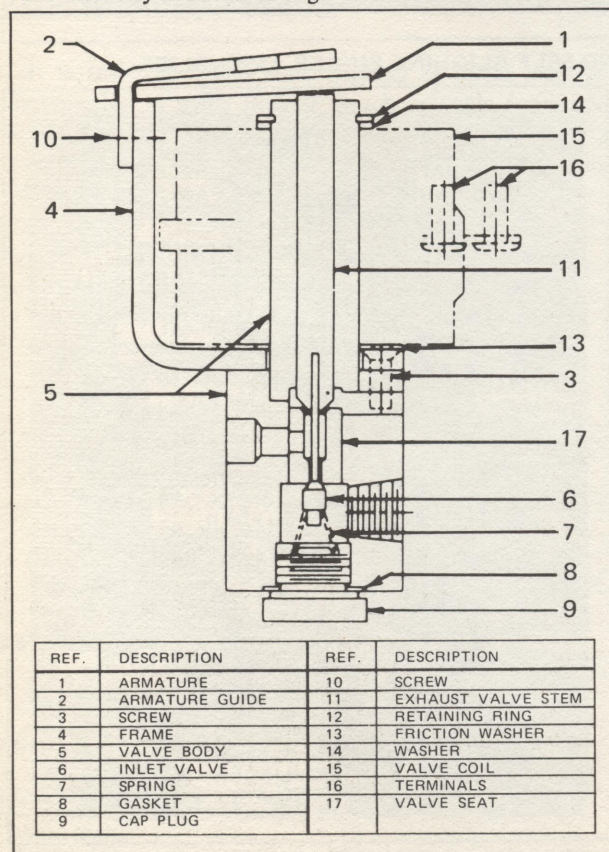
SECTIONAL VIEW OF MAGNET VALVE.
